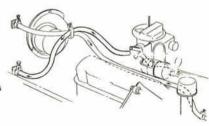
And 260 C.I.D. Engine Heater Hose Routing
